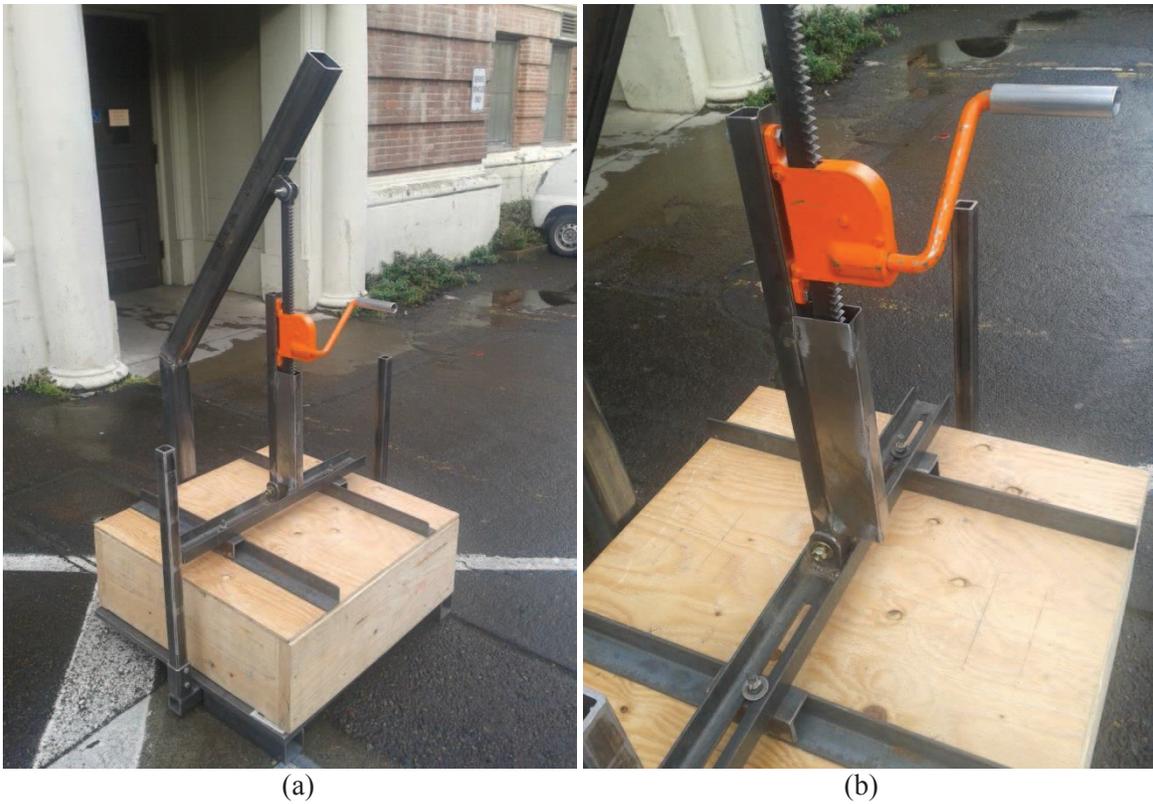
(a) shows the total overview and (b) a close up of the assembled mold clamping device.
